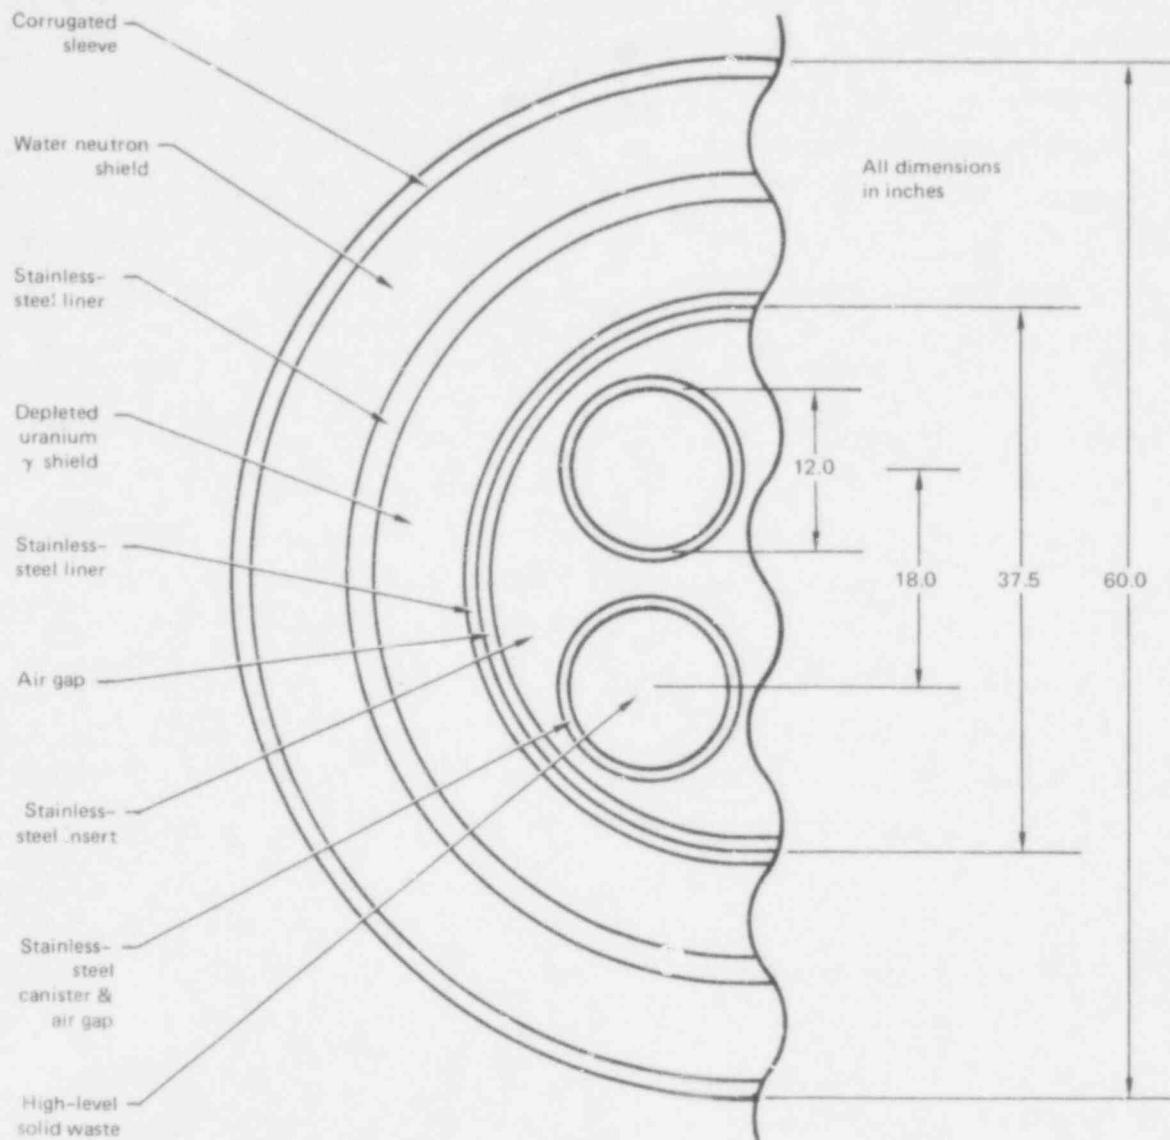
Cross-sectional end view of modified GE IF-300 rail shipping cask.
